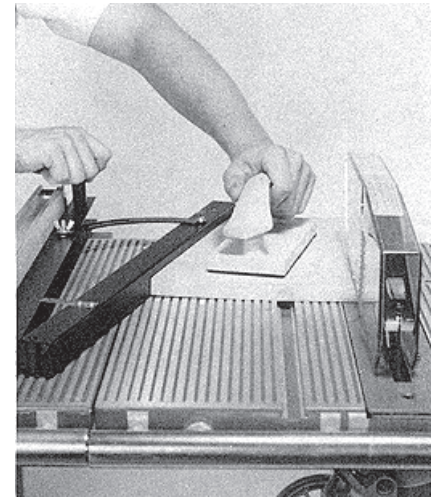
When you require the same taper on opposite edges, reposition the workpiece, set the guide for twice the original taper, and make a second pass.
